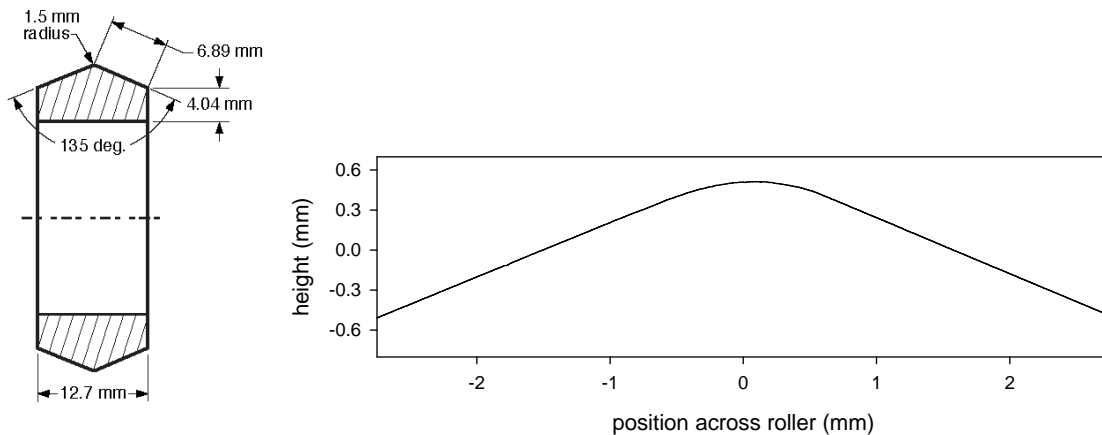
Cross section view of roller design and the measured shape of the crown radius of the 440C “blend-radius” roller used for damage initiation.
